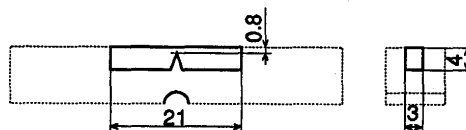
Schematic drawing of the Auger test specimen which was machined from the bending test specimen. Dimensions in millimeters.
